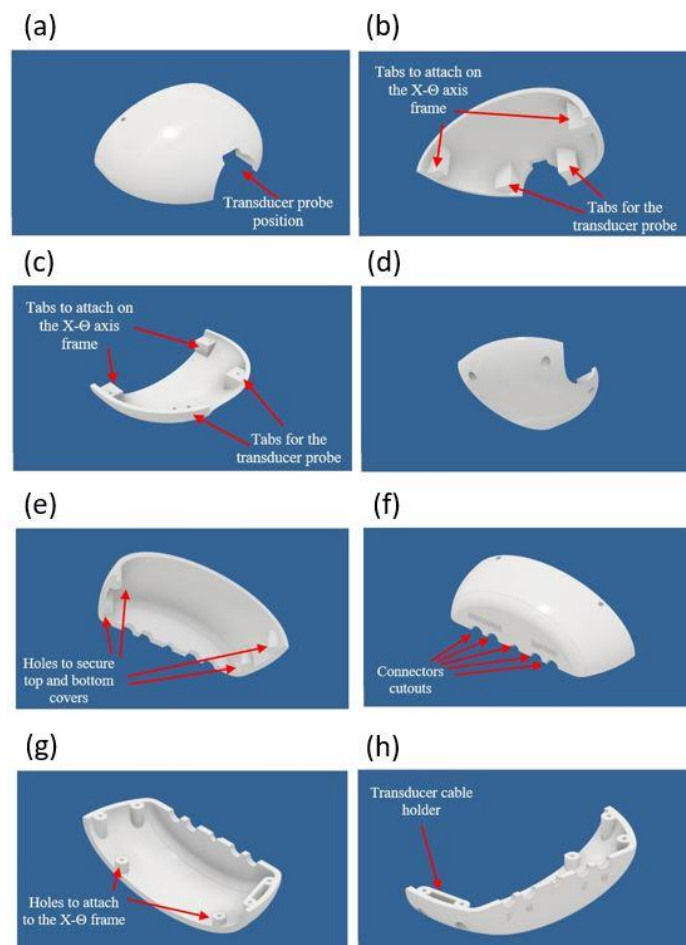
Front top cover a) front view, b) rear view, Front bottom cover c) top view, d) bottom view, Rear top cover e) bottom view, f) top view, Rear bottom cover g) front view, and h) rear view.
